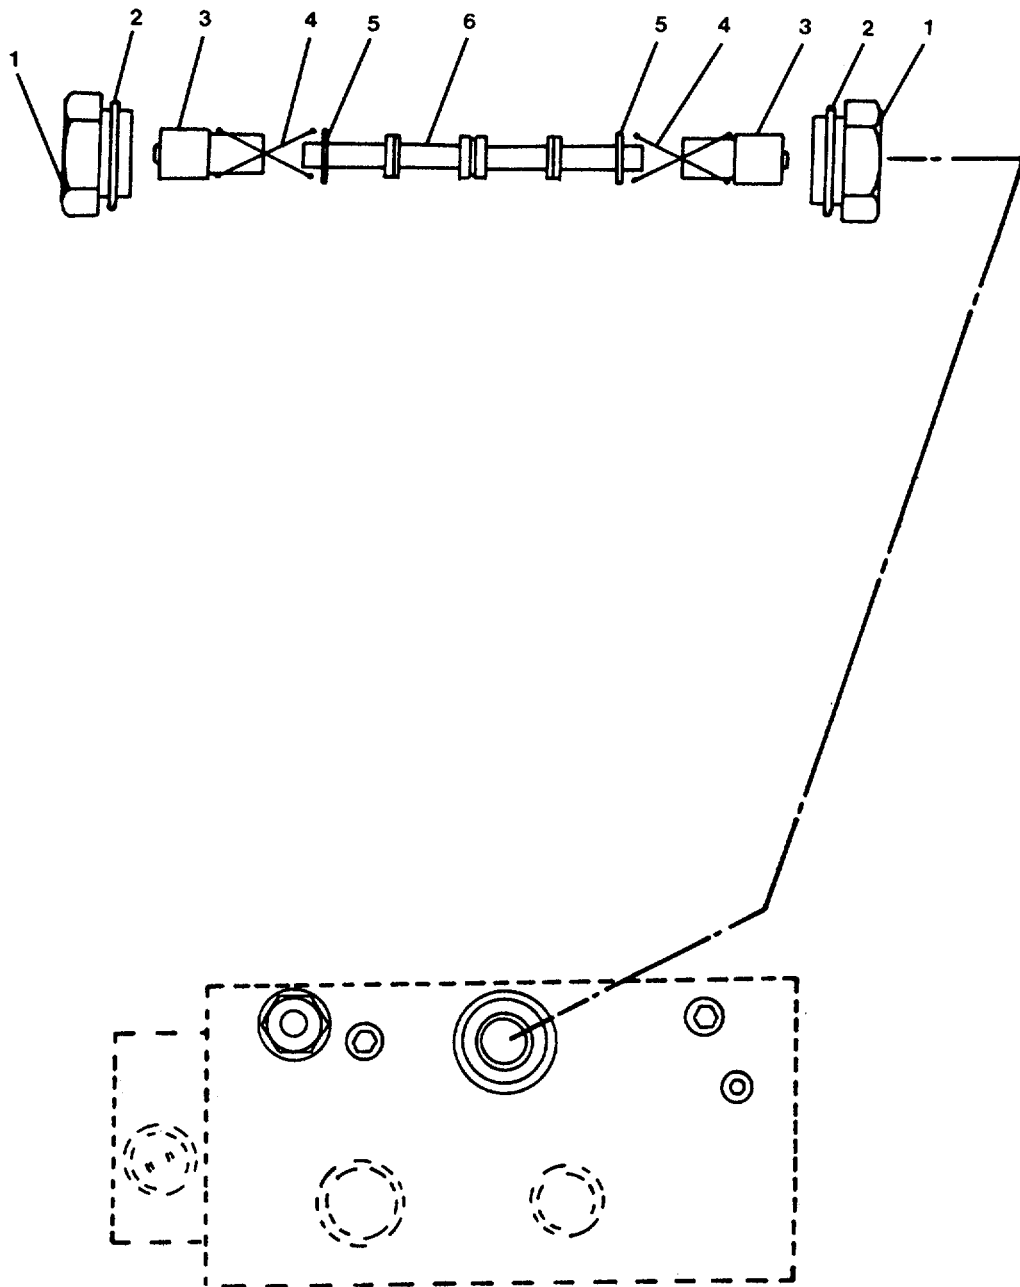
Uniblock 2-A Assembly (Sheet 1 of 3).
